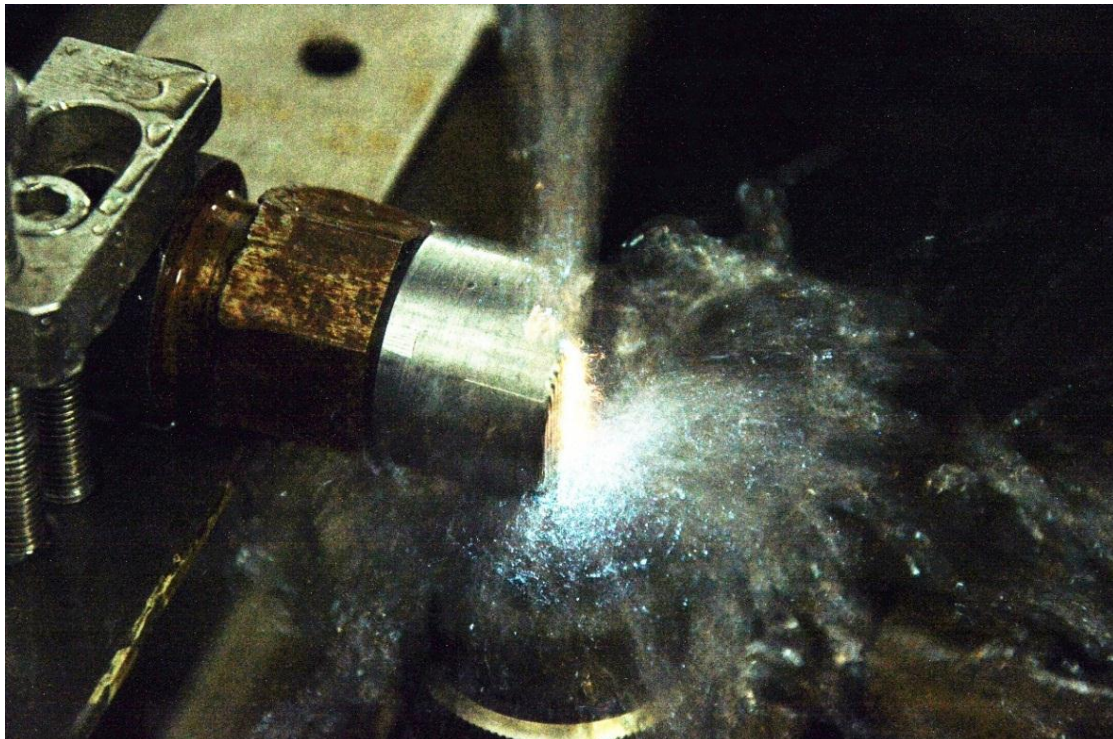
Wire EDM cutting (status: M/C ON)
